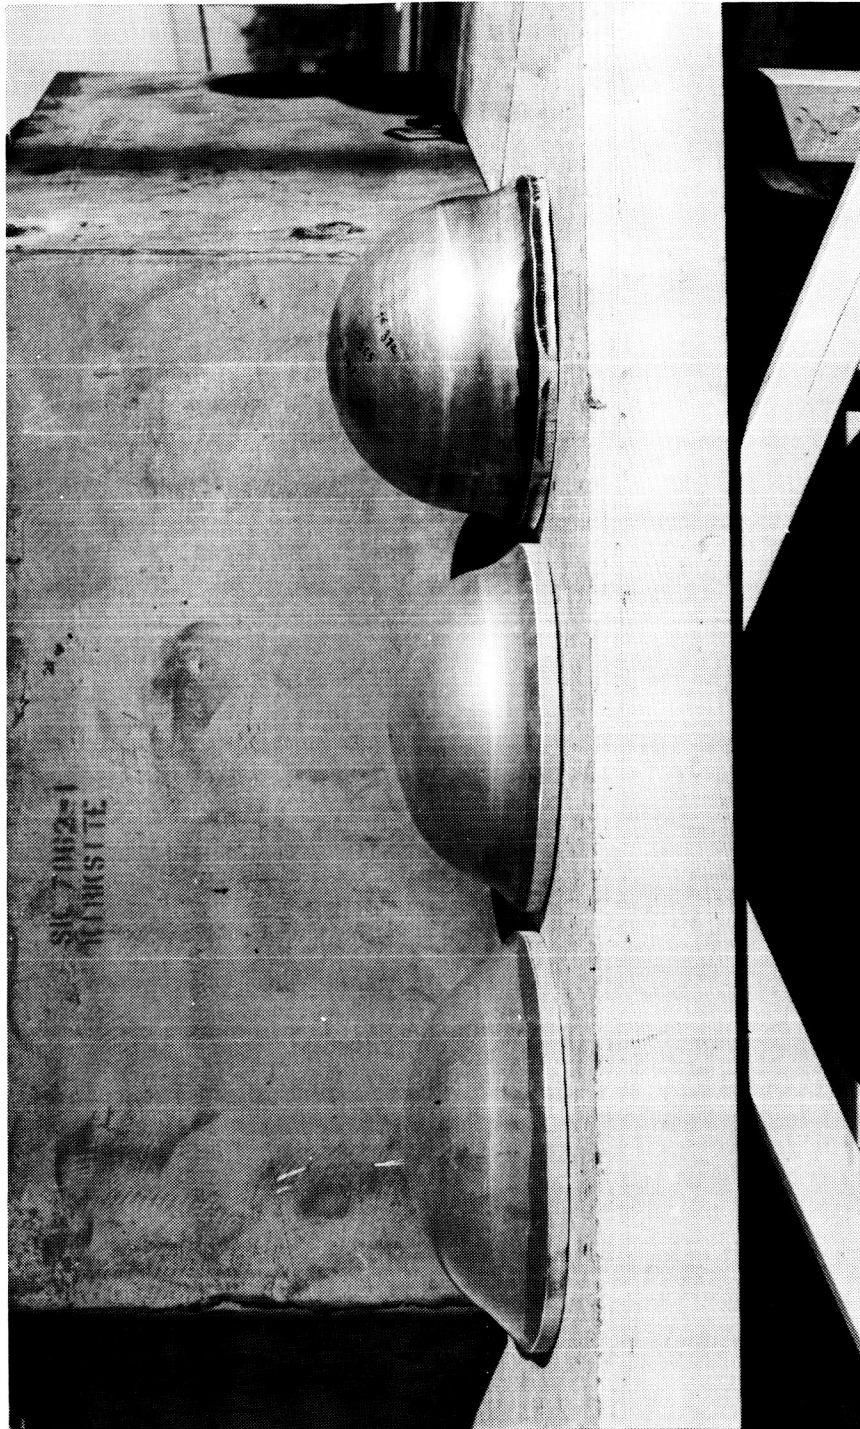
Explosive Form Draw Stages for Forward Bulkhead
